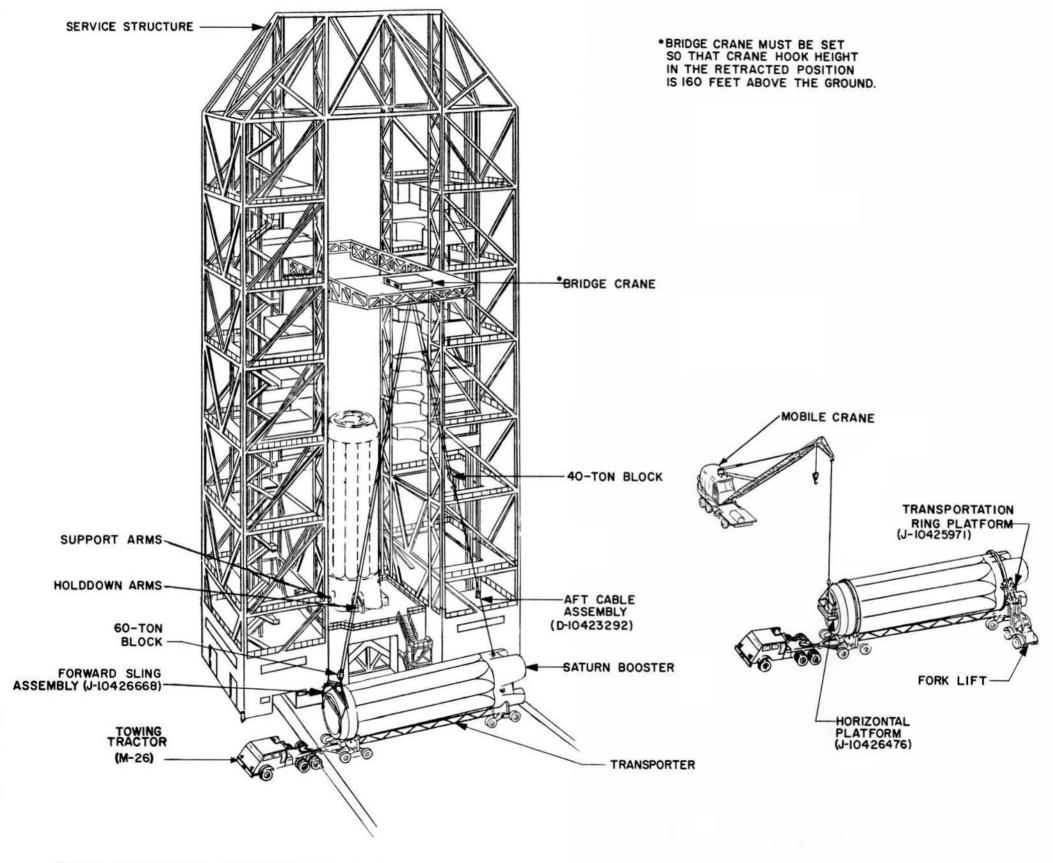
POSITIONING EQUIPMENT AT FIRING SITE
